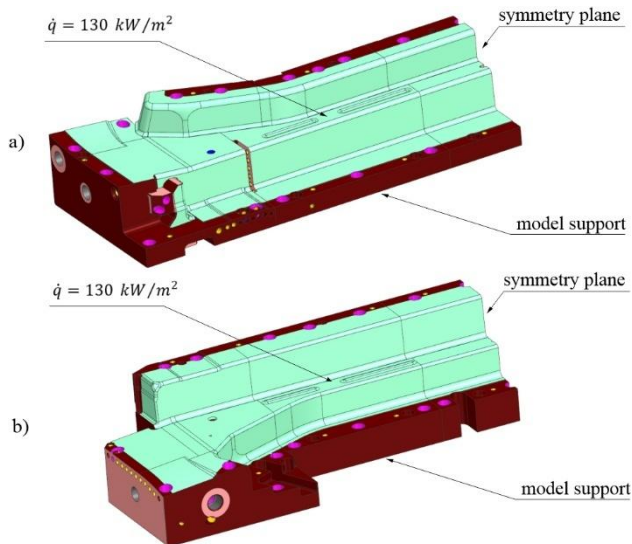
Boundary conditions for the analysis of (a) the lower part of the tool (b) the upper part of the tool
